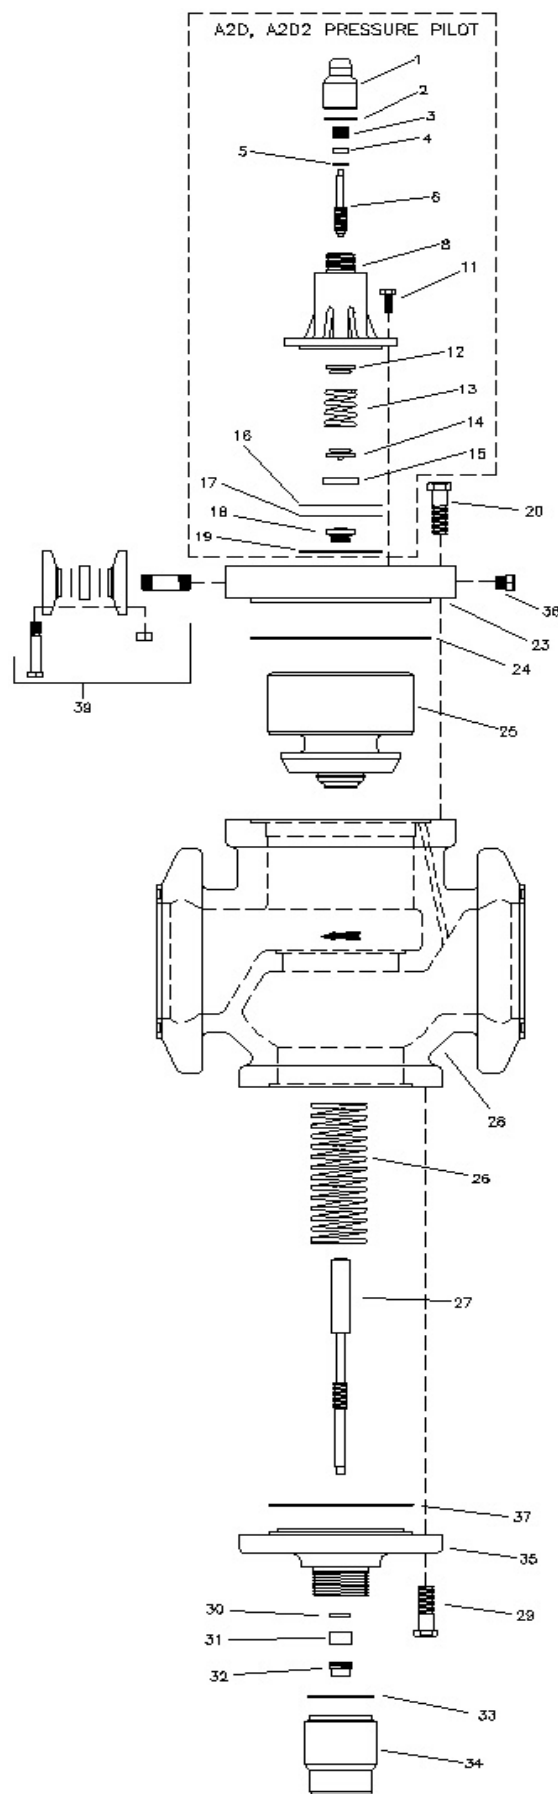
CK-5 5" - 6" Port Size Assembly and Parts List
